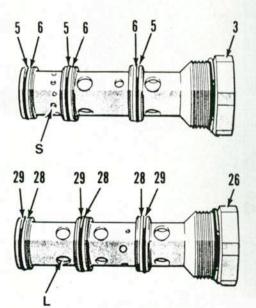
Unload valve sleeve (3) and flow control valve sleeve (26) are similar in appearance. Unload valve sleeve has small holes (S) in end of sleeve, while flow control sleeve has large holes (L). Be sure "O" rings (5 and 29) and back-up washers (6 and 28) are installed correctly.
